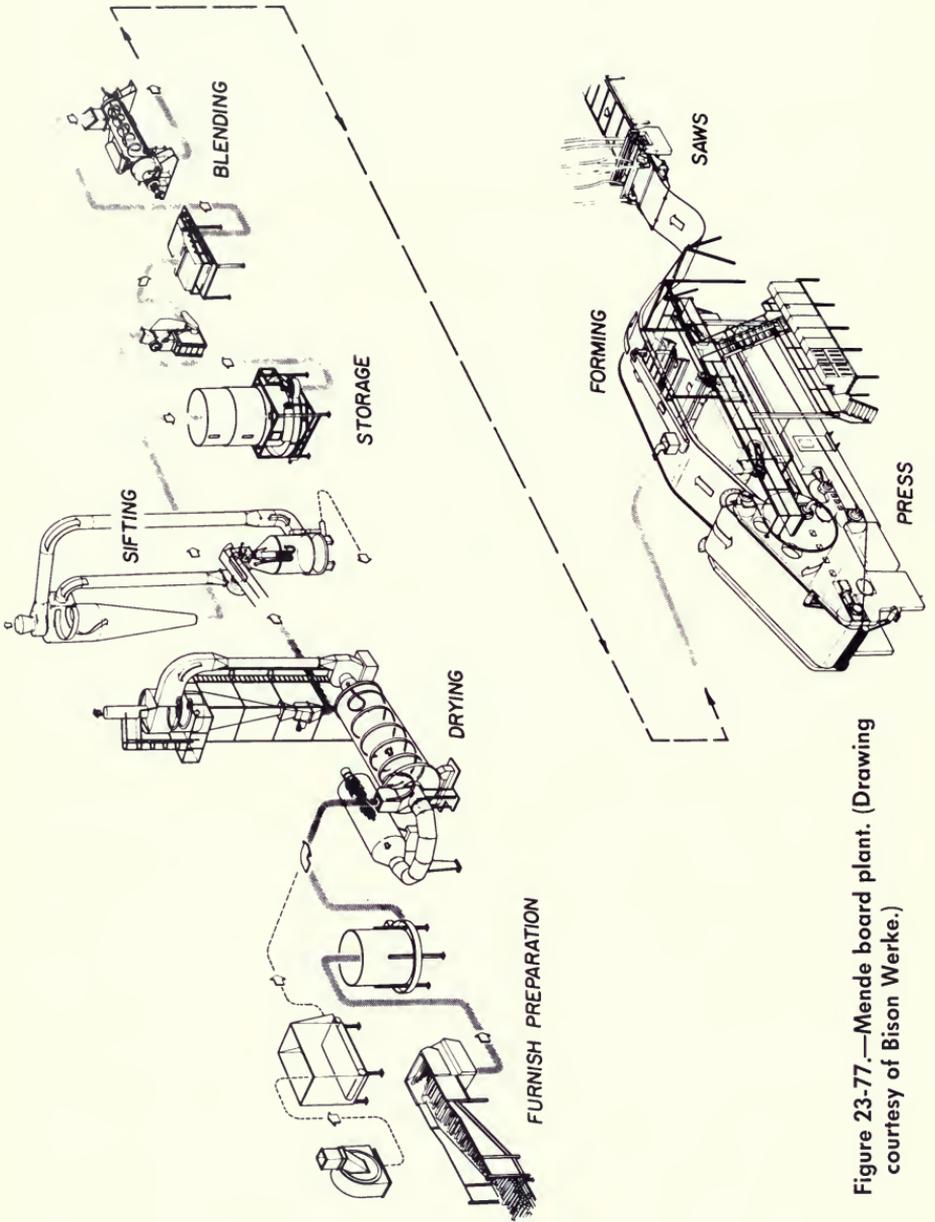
Mende board plant. (Drawing courtesy of Bison Werke.)
